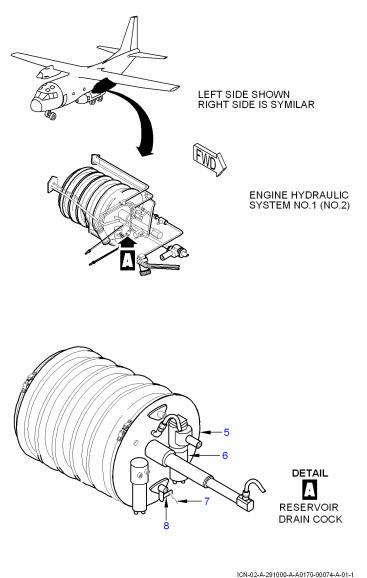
Flushing Hydraulic System - Remove Contamination (sheet 2/2)
